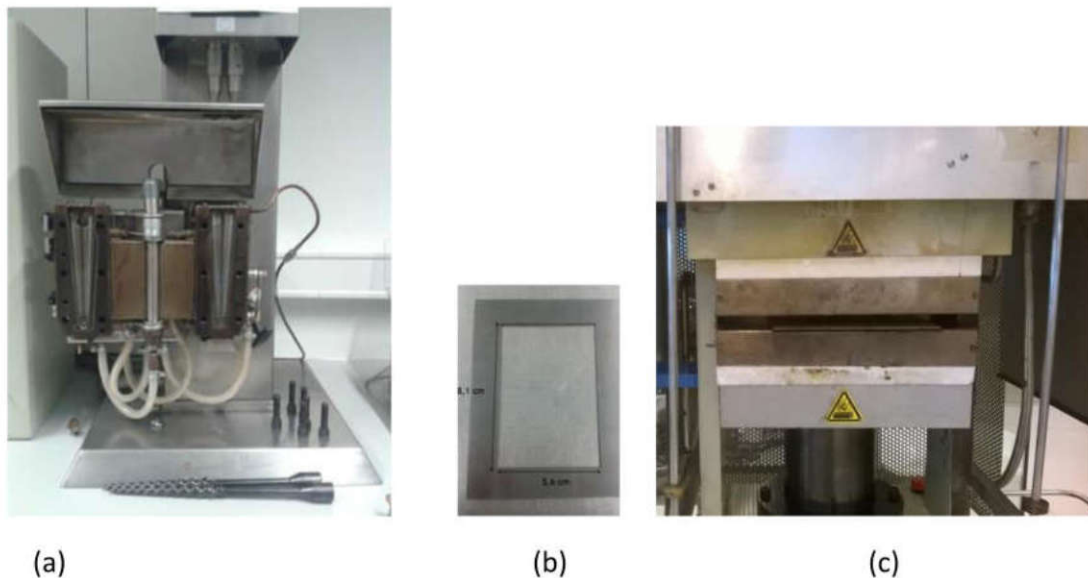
Experimental setup for gel casting process (a) Twin screw extruder, (b) rectangular mold (c) compression press
